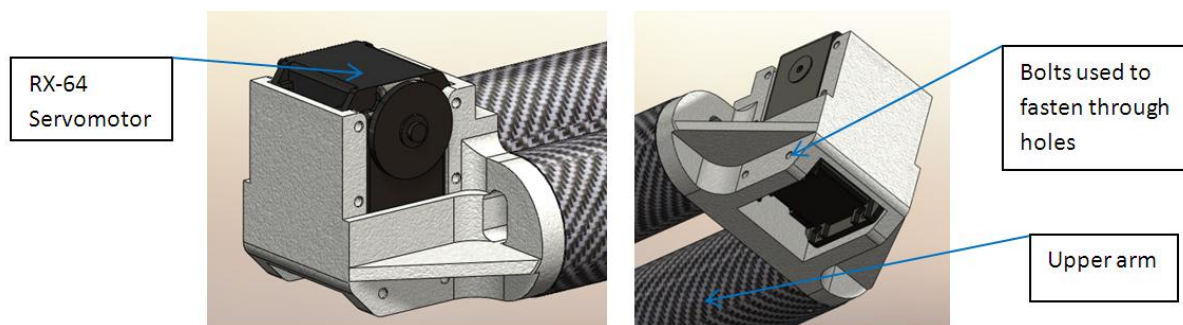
Wrist Joint (Housing RX-64 servo-motor)
